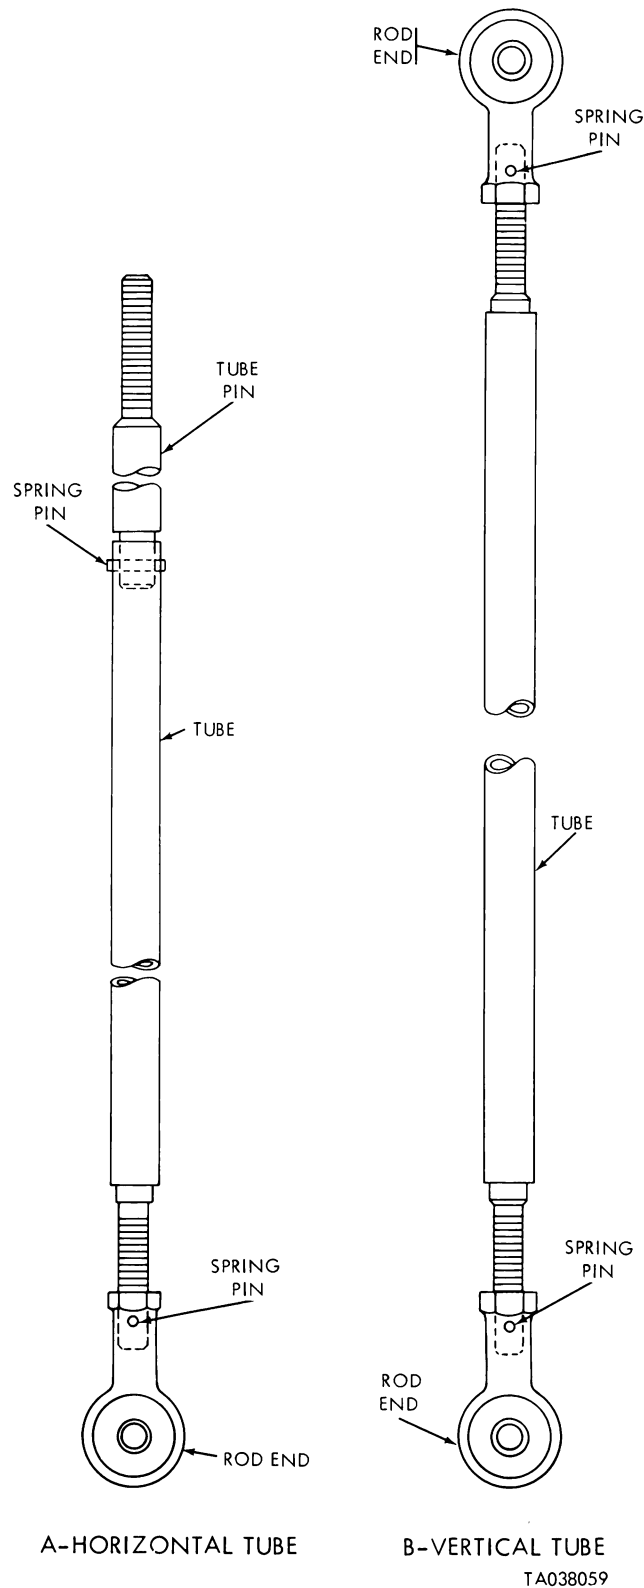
Engine compartment accelerator linkage tube disassembly and assembly.
